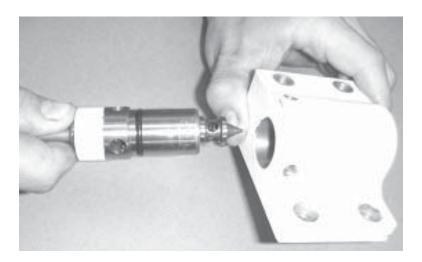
Installing Trolling Valve Parts Into Trolling Valve Body
